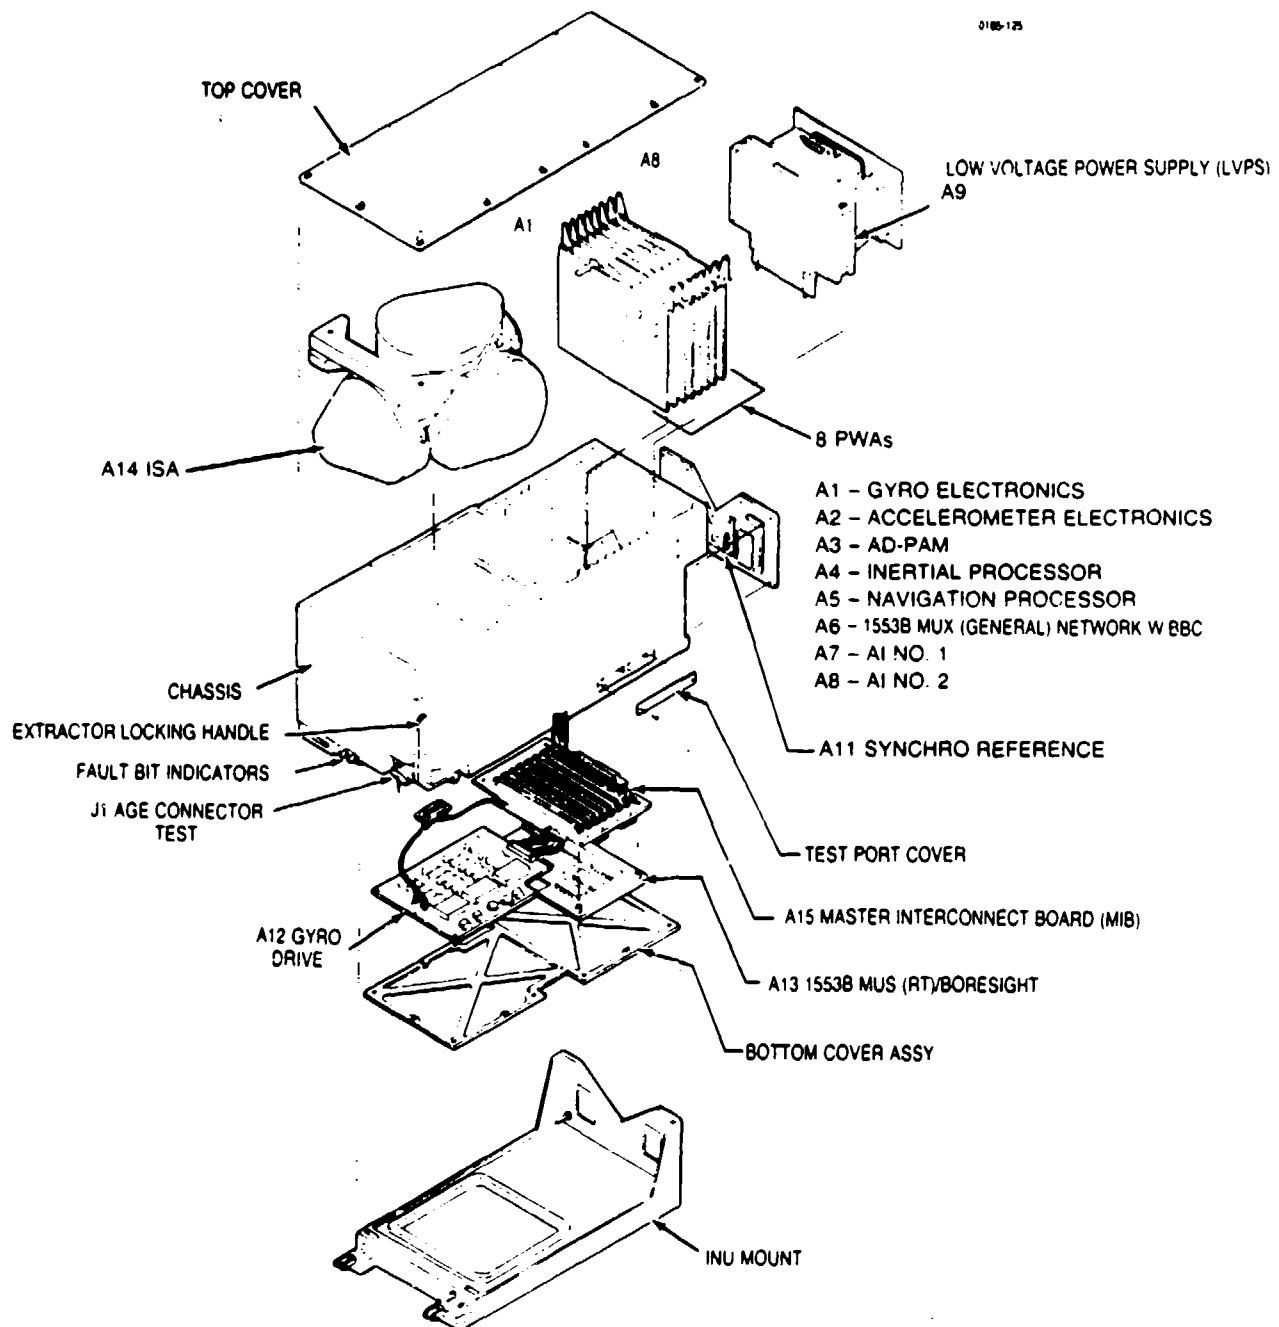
Honeywell F³/H-423 INU -- Exploded View
